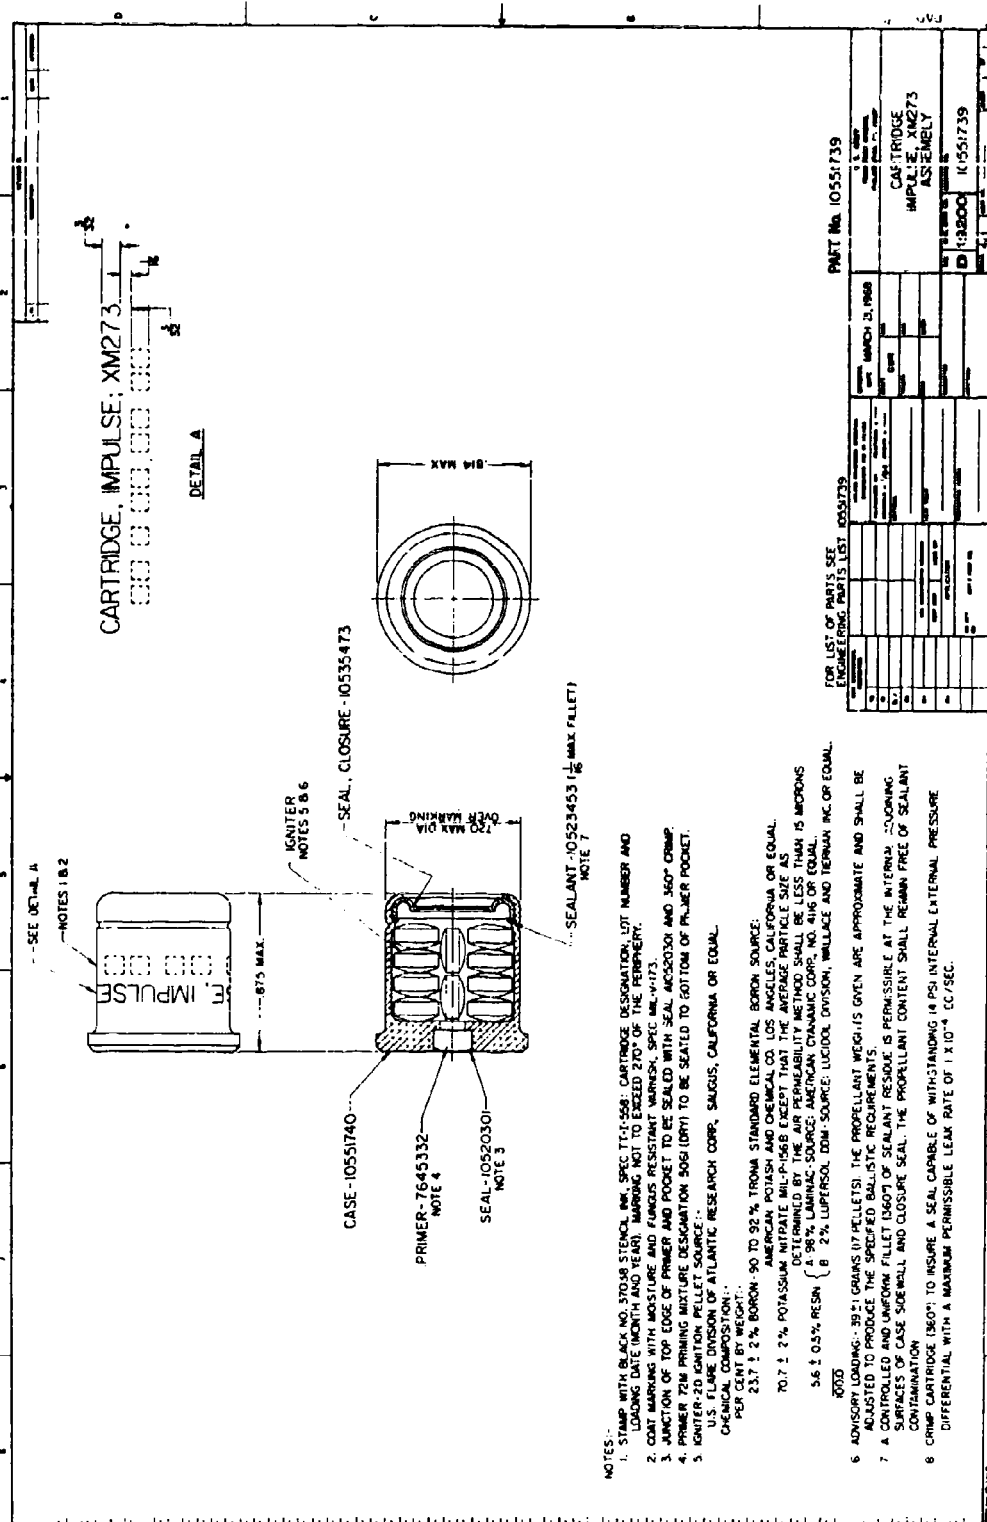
Assembly drawing, XM273 Impulse Cartridge
